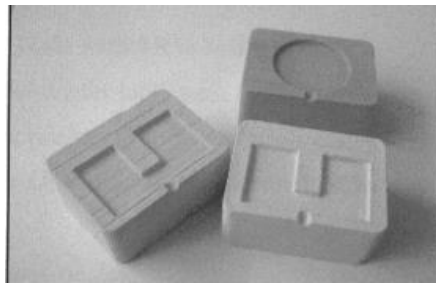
Mould tool produced by 3DP U shape and Cylinder (female)
